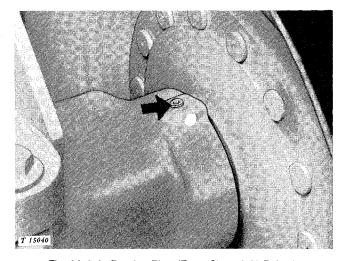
Axle Bearing Plug (Front Shown) (4 Points)
